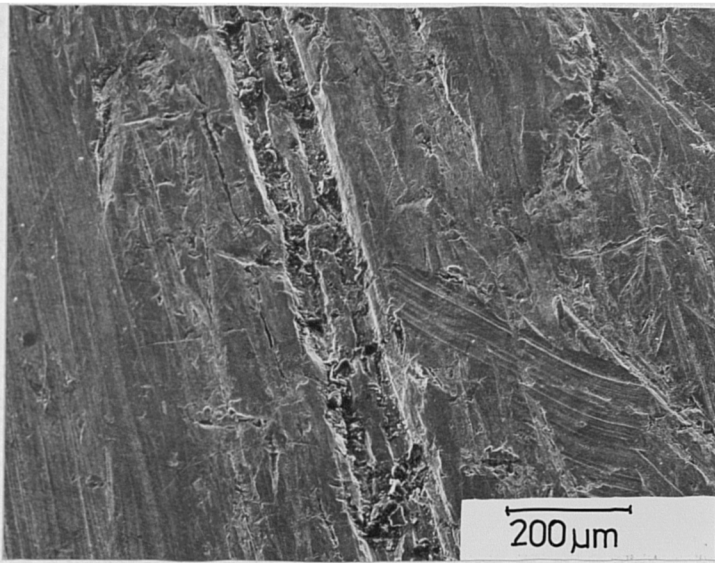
Digger tooth. Worn surface showing heavy scoring.
